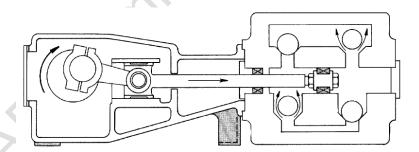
Horizontal double-acting piston pump Courtesy of the Hydraulic Institute and Pump Systems Matter, www.pumps.org
